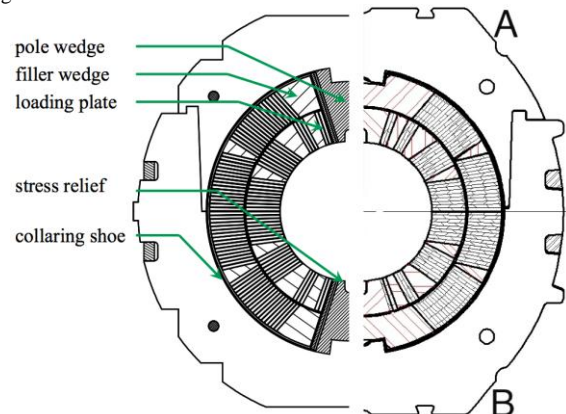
Cross-section of a collared-coil assembly with removable (left) and integrated (right) poles.
